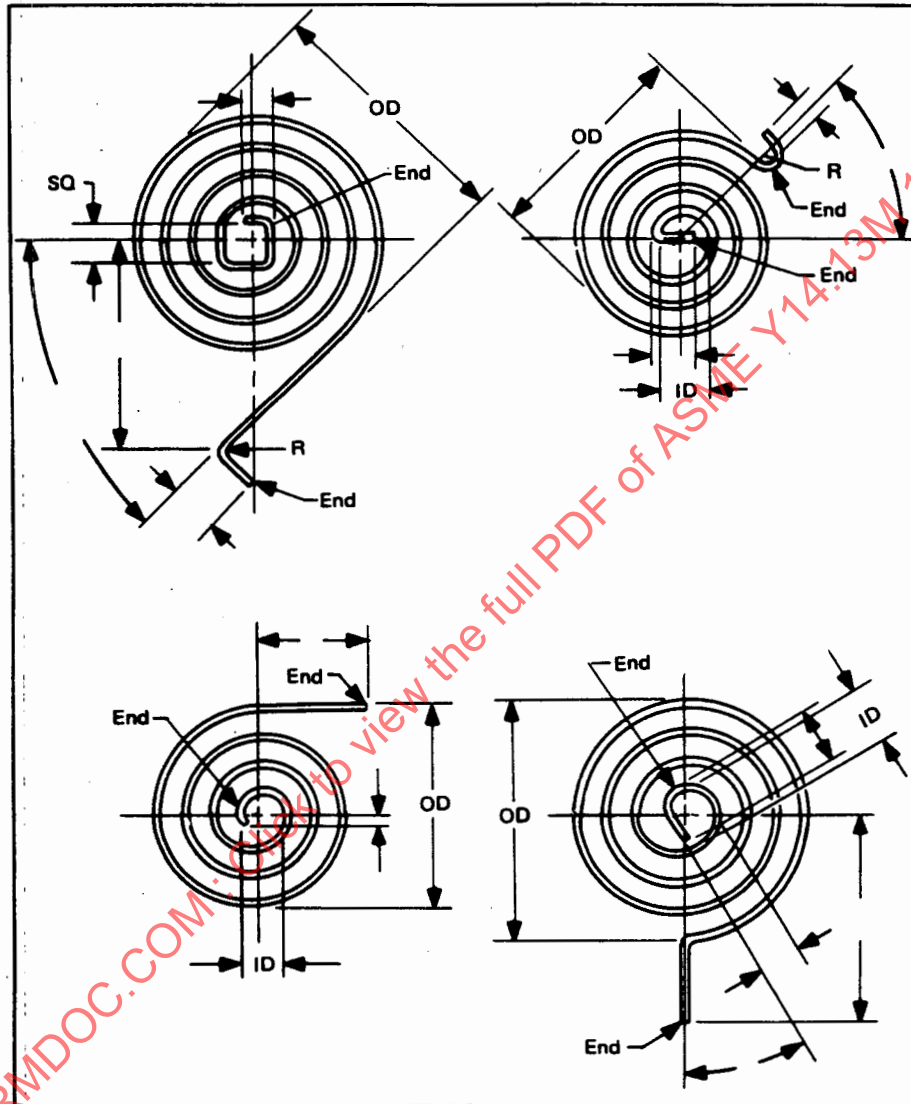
TYPES OF SPIRAL TORSION SPRING ENDS
